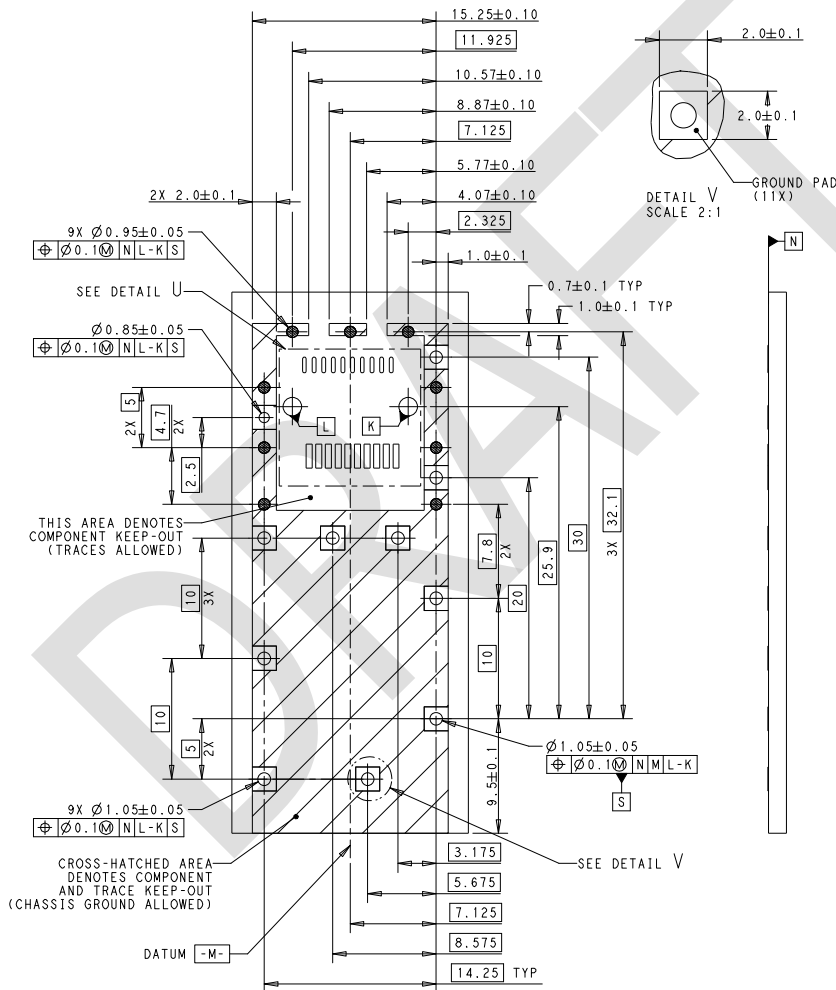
SFP2 Detailed Host Pad Layout Detail U
